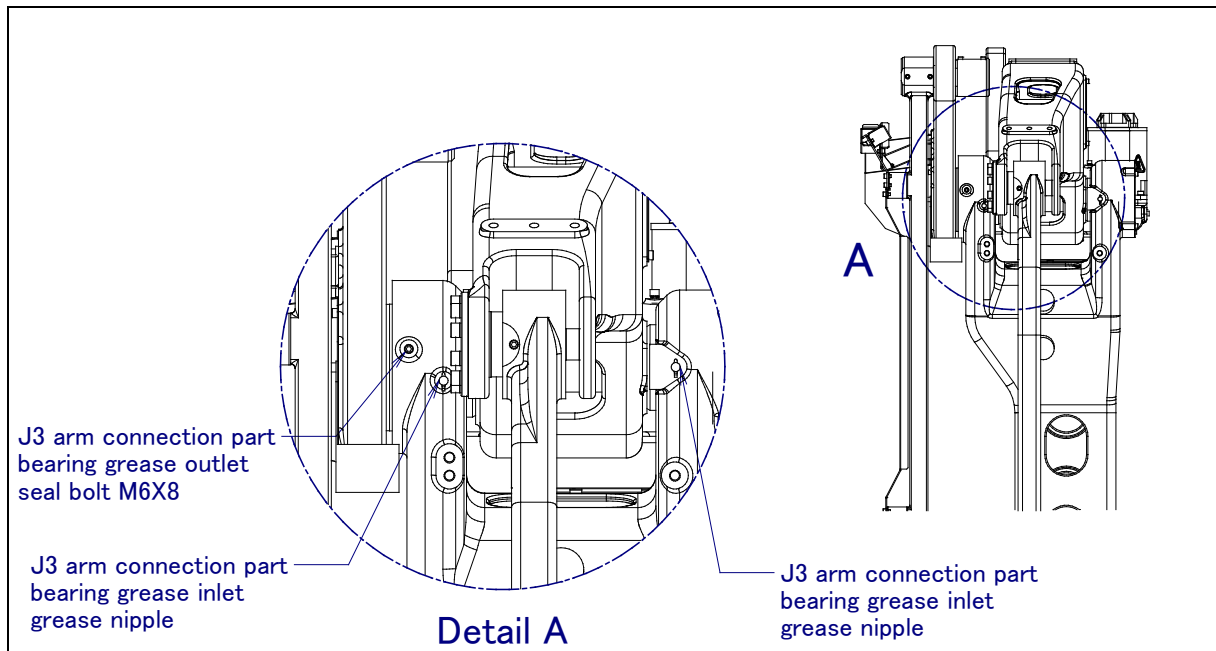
(c) Greasing for the bearing of the J3 arm connection part (M-410iC/185/315)
